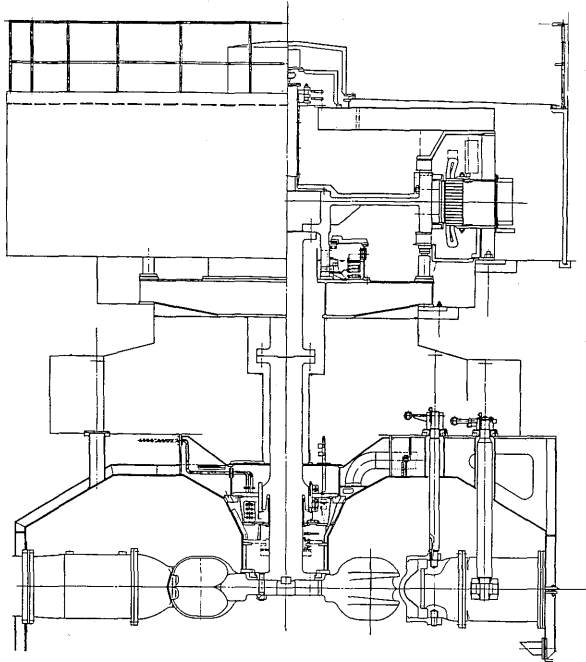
Sectional drawing of vertical Pelton turbine and generator
